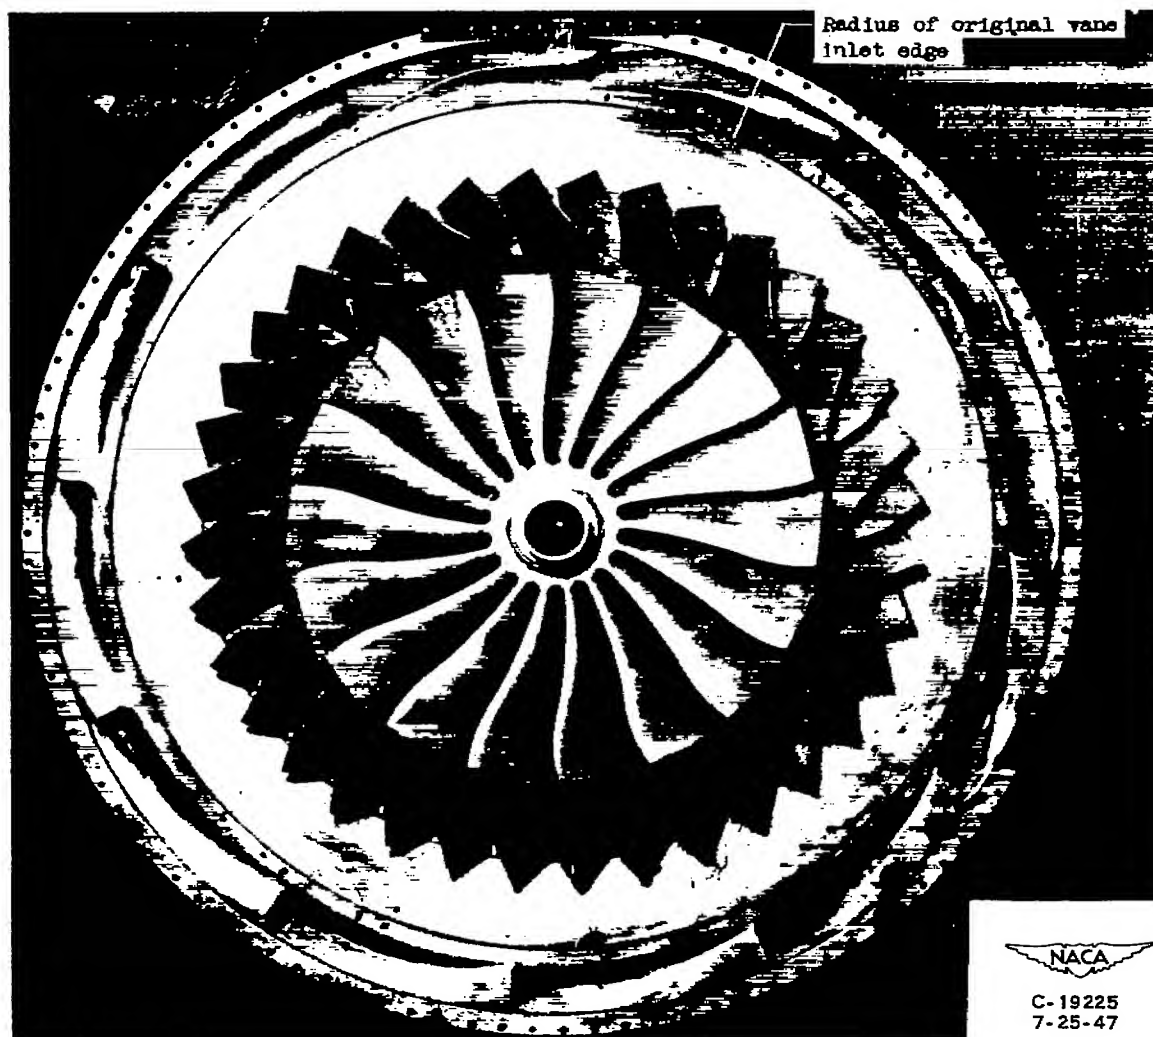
Impeller and vane-collector inlet of revised compressor.
